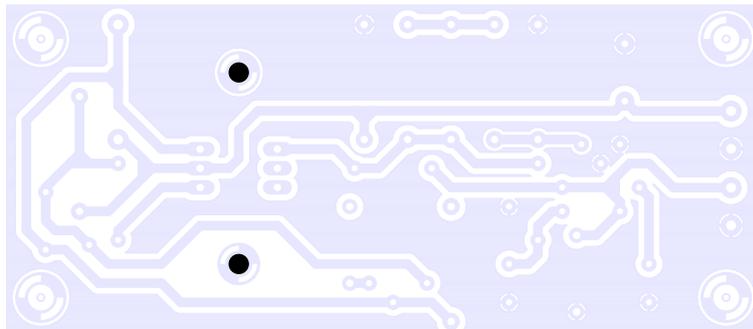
Board bottom view showing drills with 2.7 mm (0.106 in) diameter
